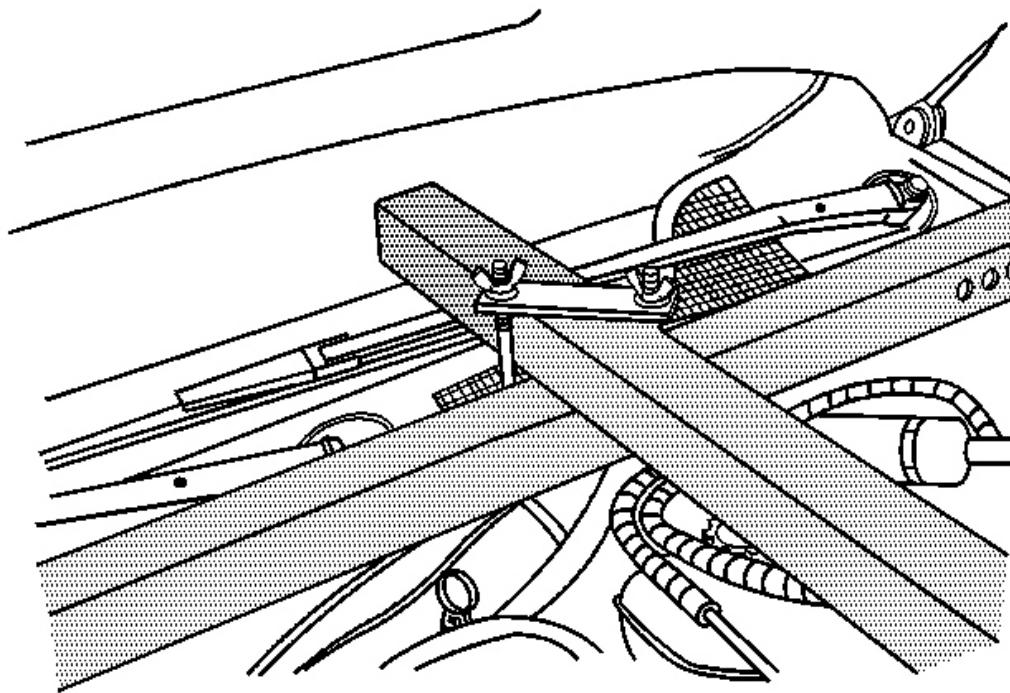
Installing Quick Release Pin J 28467-9
